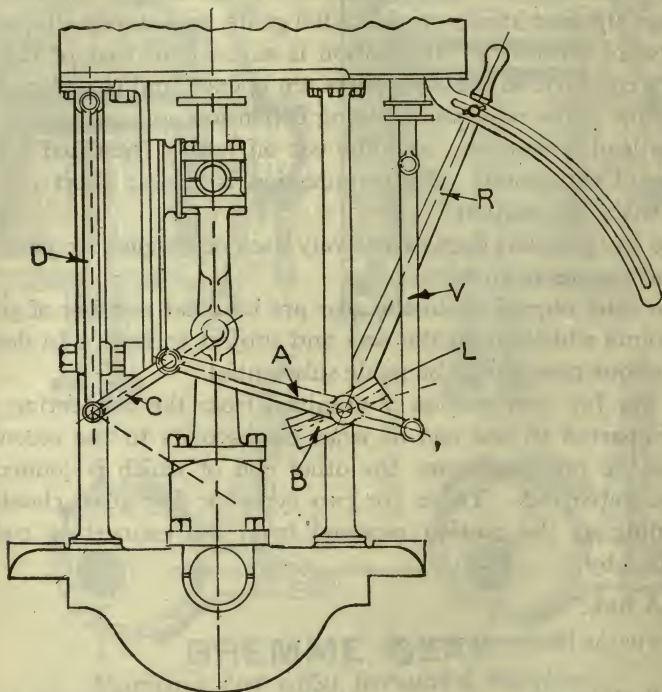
Joy valve gear, link type. In this gear, as can be seen, no eccentric is employed, the motion being taken from the connecting rod, thus permitting more liberal main bearings.
